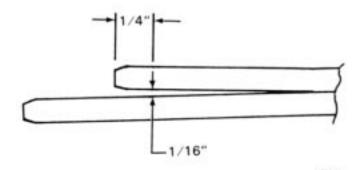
Measurement Location And Tolerance For Sprung Leaves
